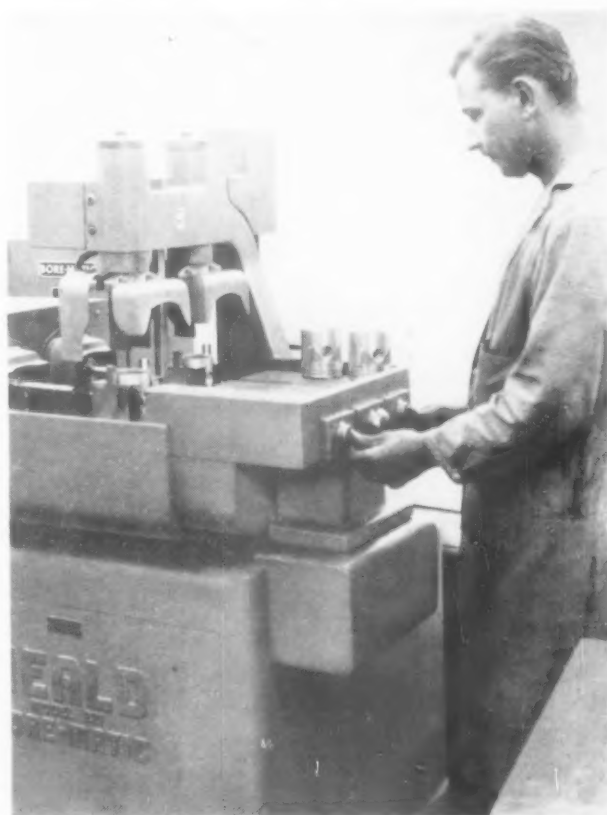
(Above) Three station workholding fixture mounted on double end machine—a common method of boring piston pin holes. Fig. 2, at right, shows two station, end operated, single end Bore-Matic. Two pistons are loaded into workholding fixture, located by Vee blocks on pin hole bosses and clamped simultaneously by left and right hand push button stations at end of table. Machine cycle is started, with "in" feed at 60 in. per min. At completion of "in" boring, table reverses and feed rate changes to 18 in. per min. for "out" finish cut.
